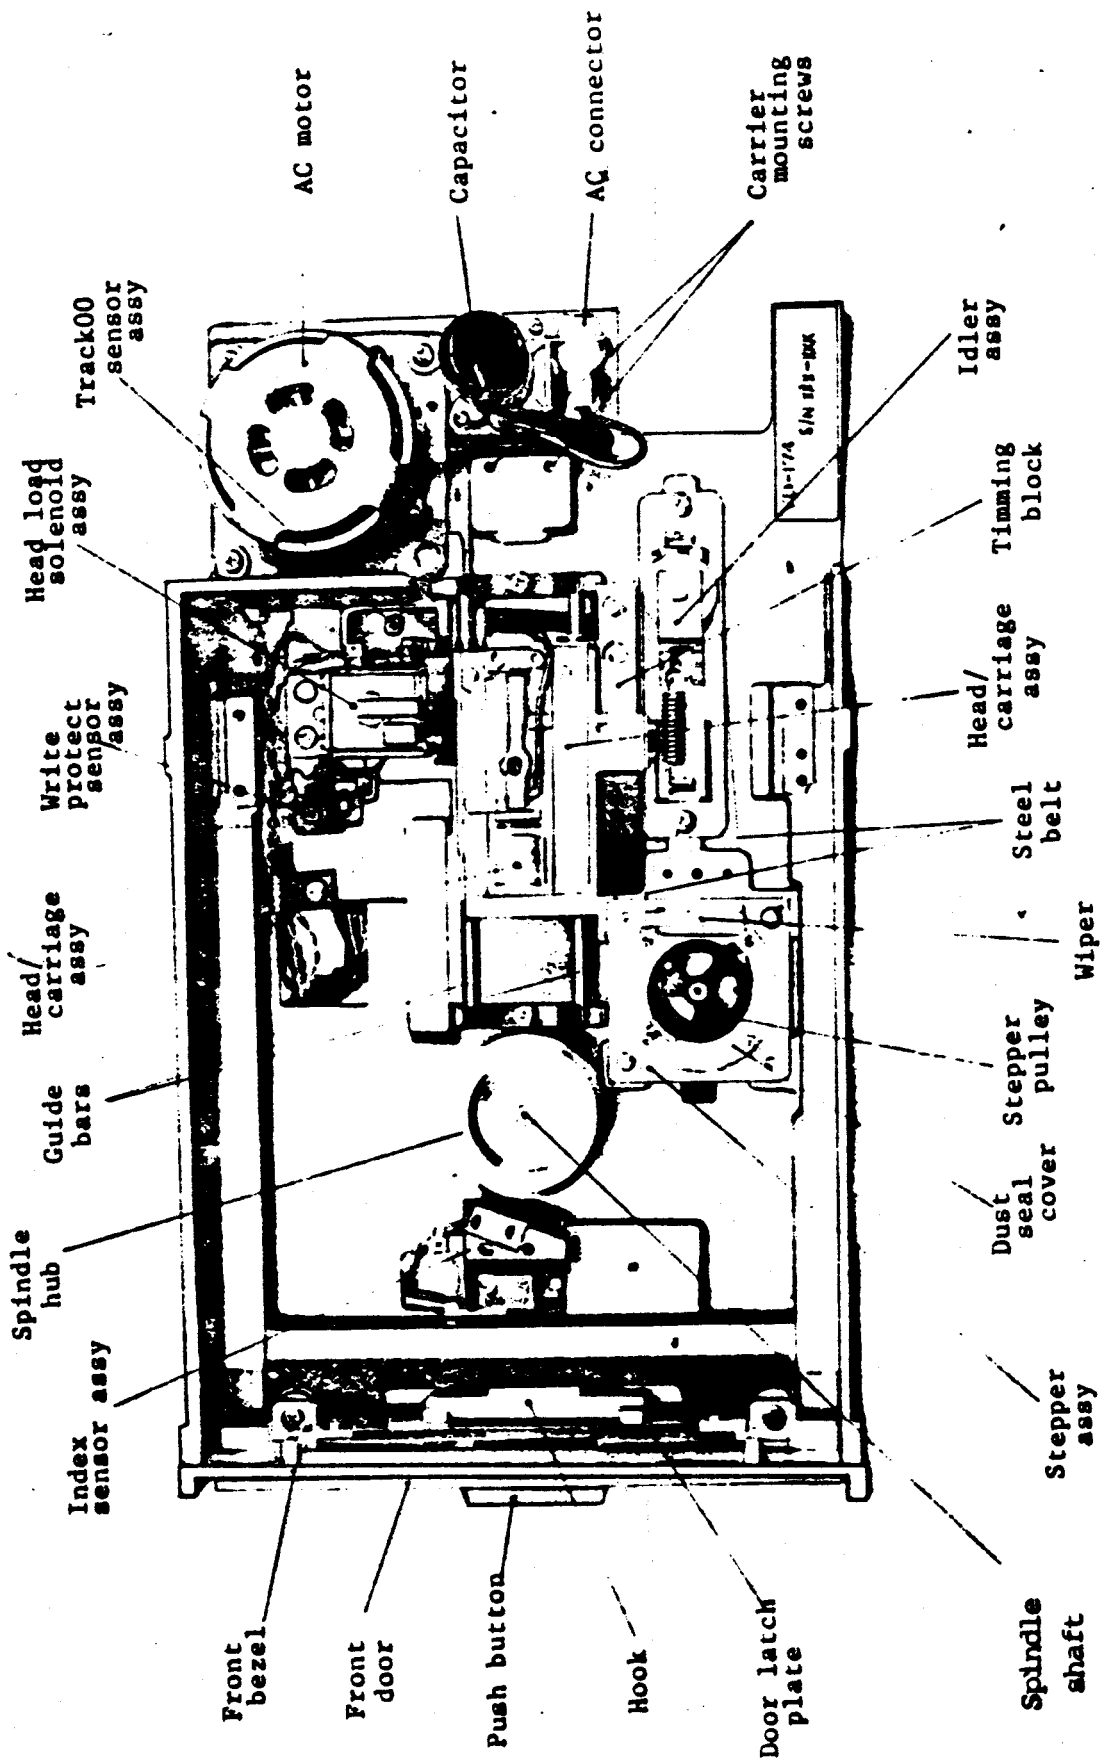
Top view of YD-174 with carrier, bail and pop-up assy removed
